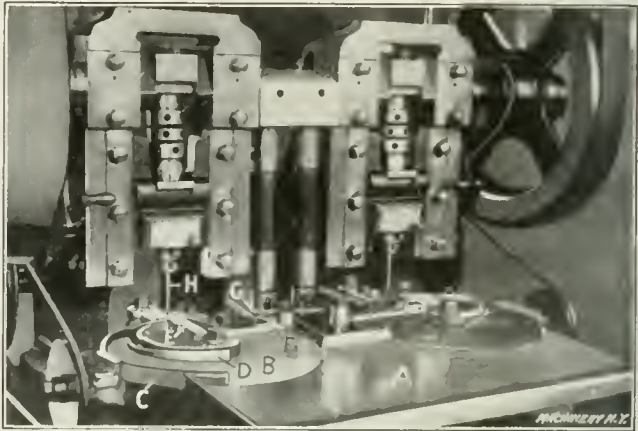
Double-headed Friction Dial Drawing Press used for the Various Drawing Operations
